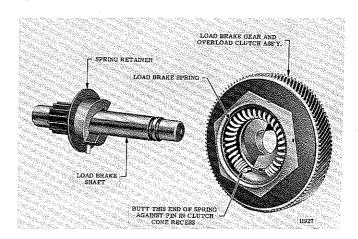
Load Brake Gear and Overload Clutch Assembly Removed from Load Brake Shaft Showing Brake Spring Installed in Clutch Cone
